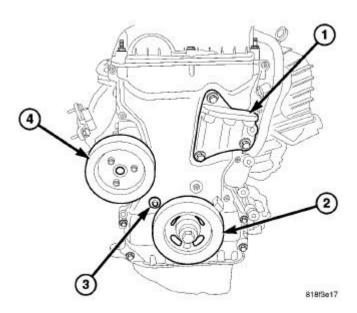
Right Side Engine Mount Bracket, Crankshaft Damper & Water Pump Pulley Courtesy of CHRYSLER GROUP, LLC
